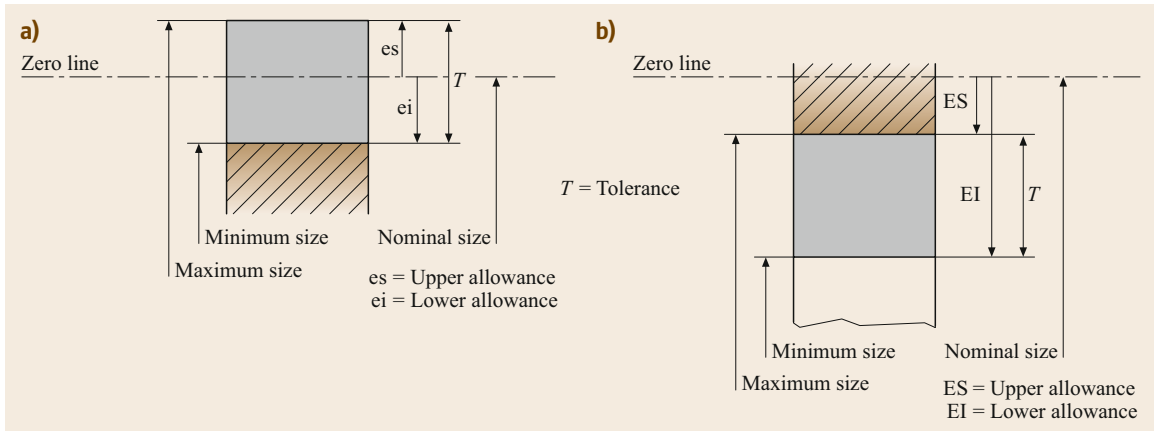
,b Tolerance specifications for lengths: (a) shaft, (b) hole
